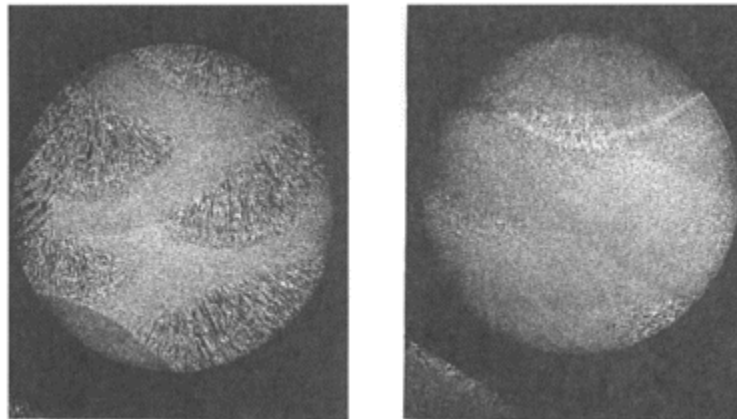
The carbon-manganese submerged arc weld on the left hand side with clear, alternate refined and unrefined ferrite, gave 512 N/mm^2 UTS whilst the essentially refined weld metal on the right hand side from the same weld gave only 457 N/mm^2 UTS.
